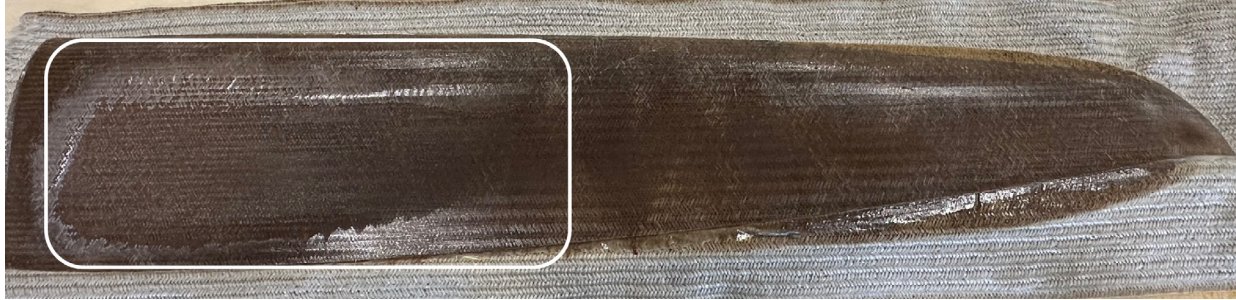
Propeller made in Trial 4 with large surface defect due to air bubble caused by rubber insert gap filler.
